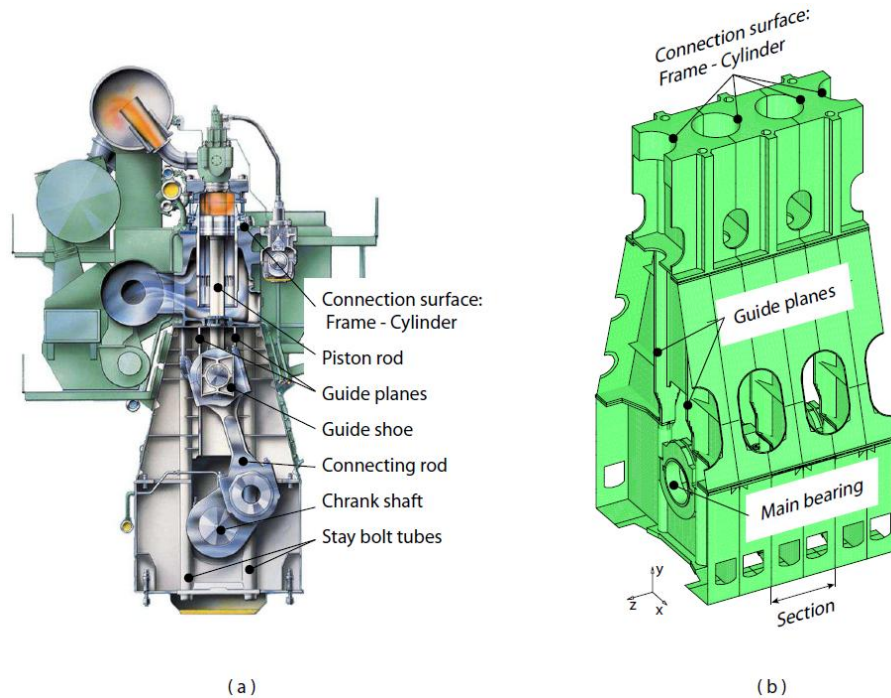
Large two stroke engine a) Cross section of engine illustrating the basic principles and parts b) Abaqus model of the main structure.
